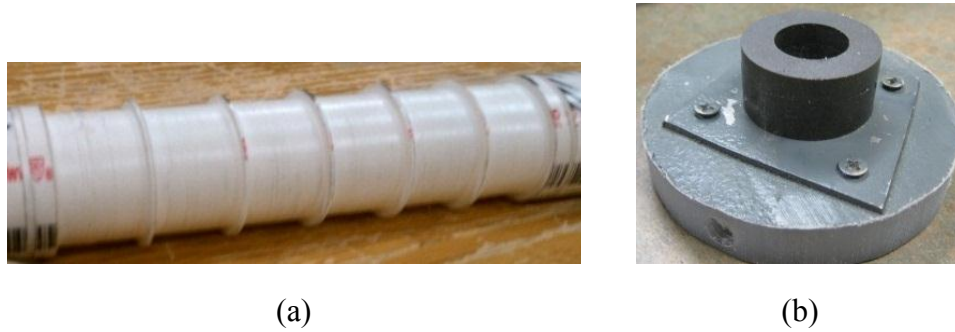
Coil bobbin before windings are added (a), and small spring magnet with mount (b).
